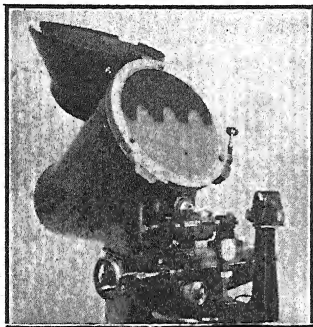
The Jones and Lamson Pedestal-Type Comparator and Measuring Machine Set Up for Inspecting the Teeth of a Gear Hob.
